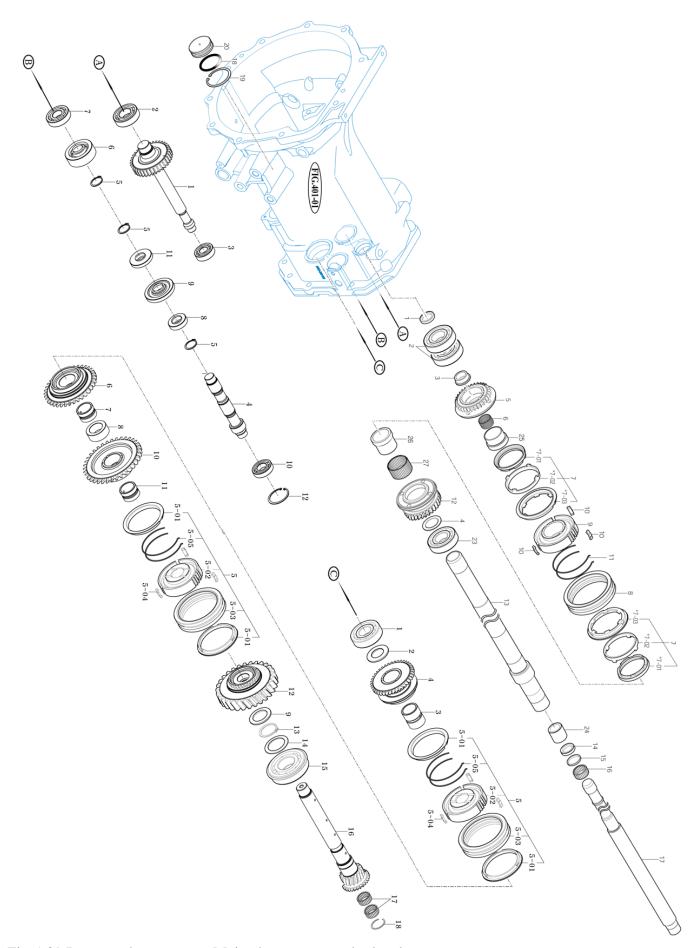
Reverse change gears, Main change gear and related parts. 5-18
